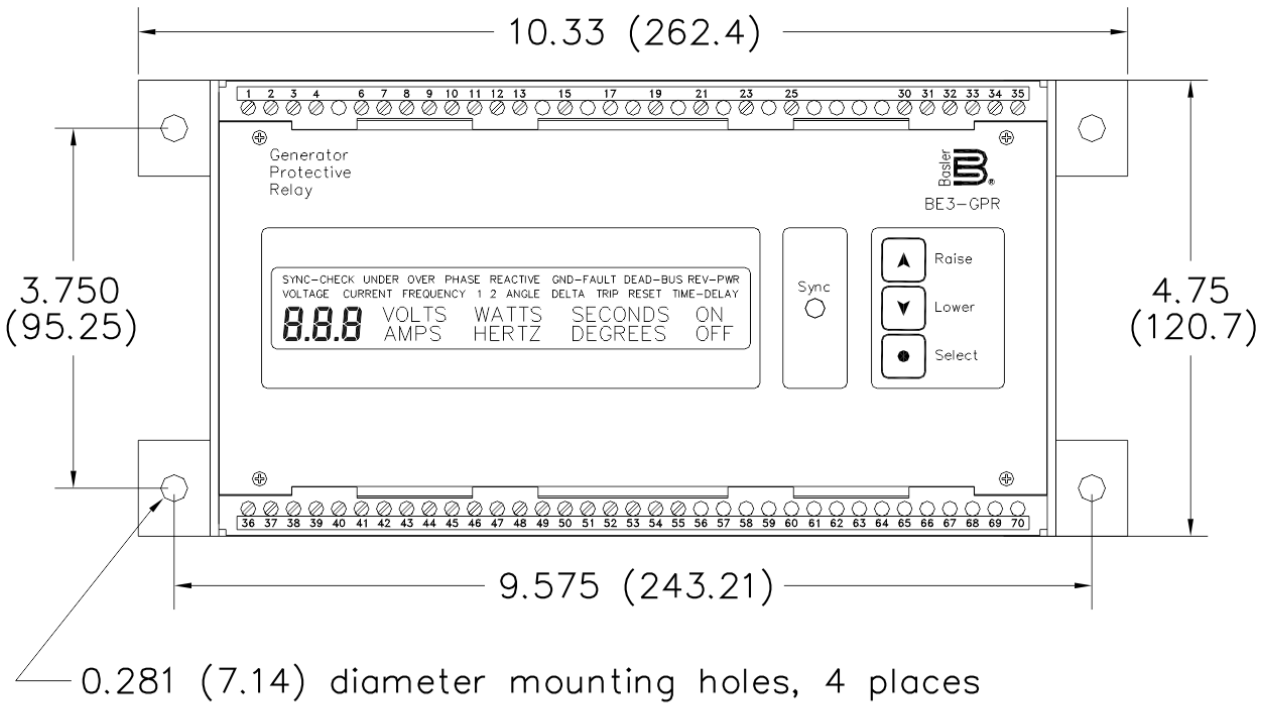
Overall and Mounting Dimensions, Surface Mounting (Style xxxxF)
